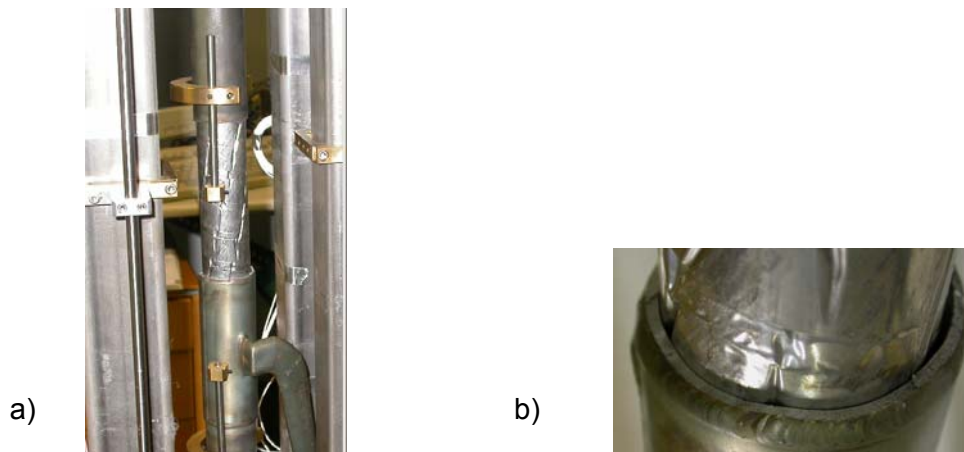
Image (a) shows the structure after the failure inside the rig. Image b) shows the fatigue failure occurrence at the weld/base fusion boundary of the tube.
